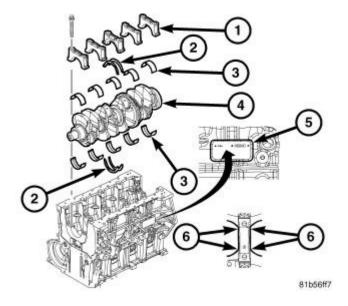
CRANKSHAFT CAP LOCATION MARKS
